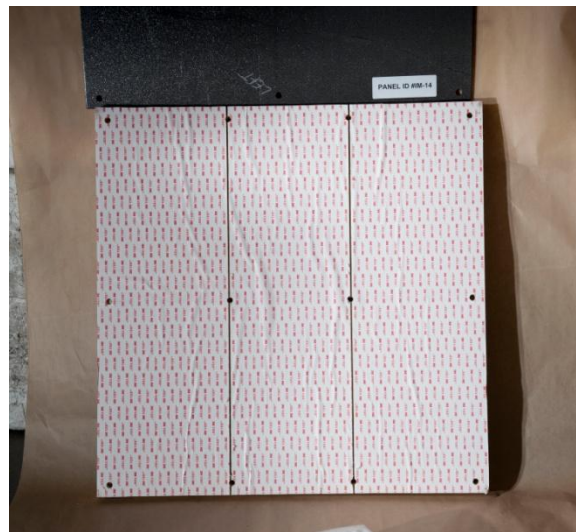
View of double-sided tape with cut lines on back of panel IM-14.
